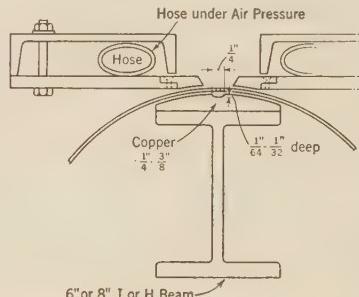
JIG FOR WELDING LONG LENGTHS OF THIN-GAGE MONEL AND NICKEL
